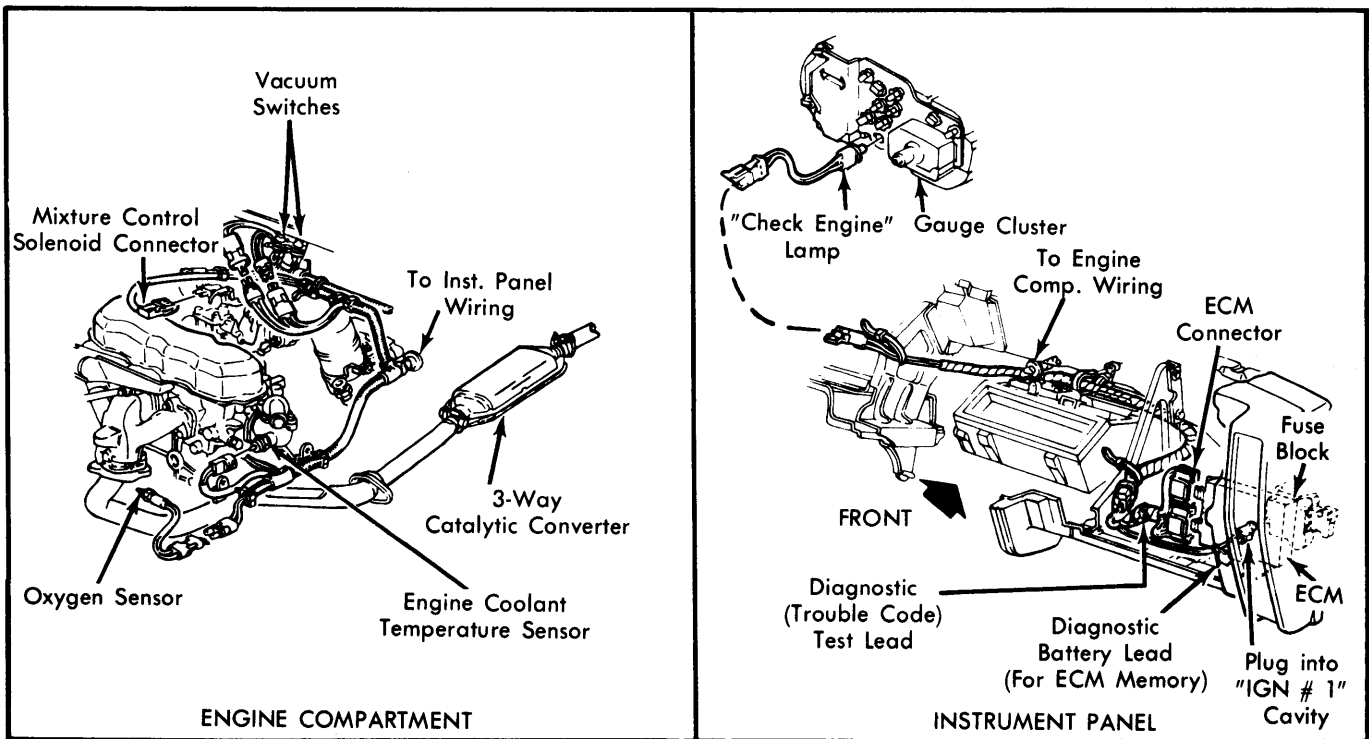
Layout of Typical C-4 System Showing Engine and Instrument Panel Component Locations
